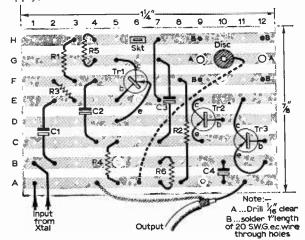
Wiring details of the Veroboard. Care should be taken when soldering transistors directly in circuit.
